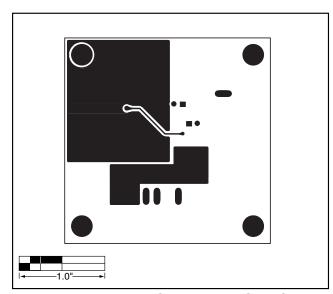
MAX1790 EV Kit PC Board Layout—Solder Side
